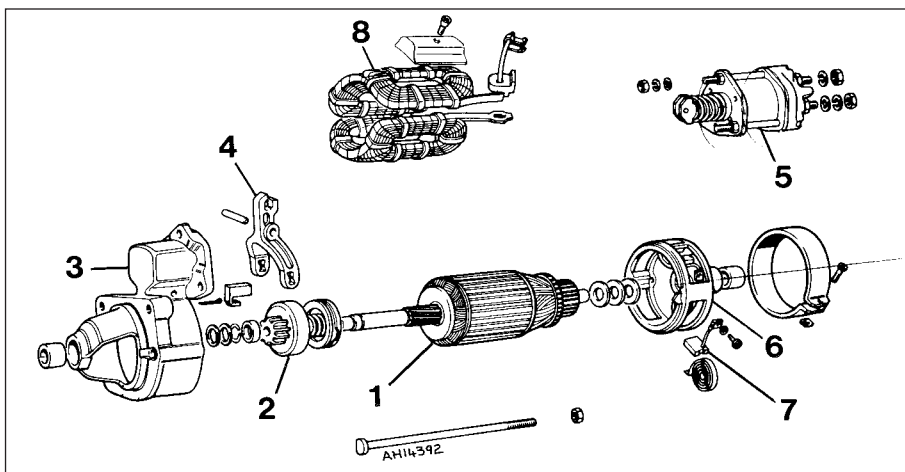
Exploded view of typical starter motor (Sec 9)
